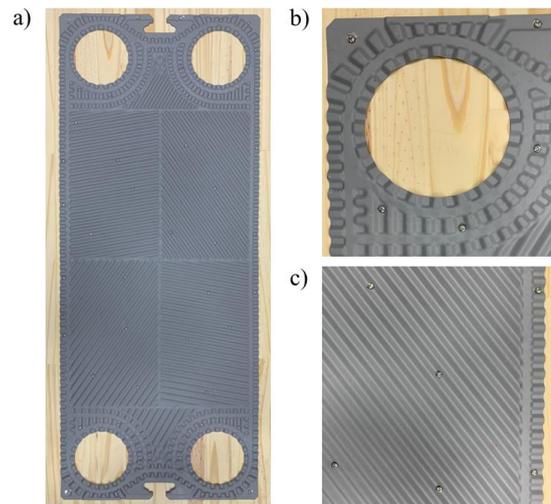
Corrugated plate fixed to the wood board: a) complete plate fixed, b) fixing the distribution section, and c) fixing the corrugated section.
